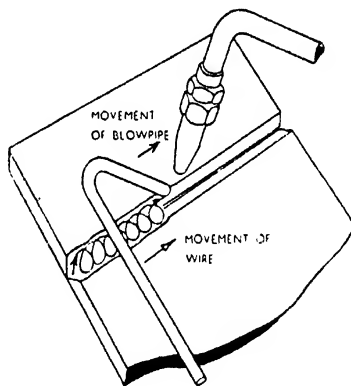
THE RIGHTWARD METHOD OF WELDING
